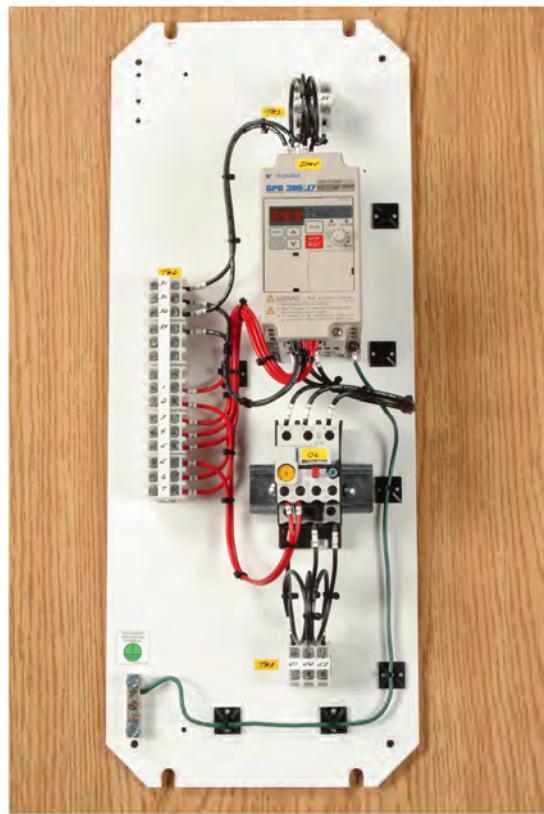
Assembled AC motor drive (new MCE mounting plate).
